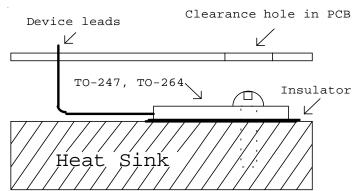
Evaluation board side view showing a power device installed in a high power configuration.
